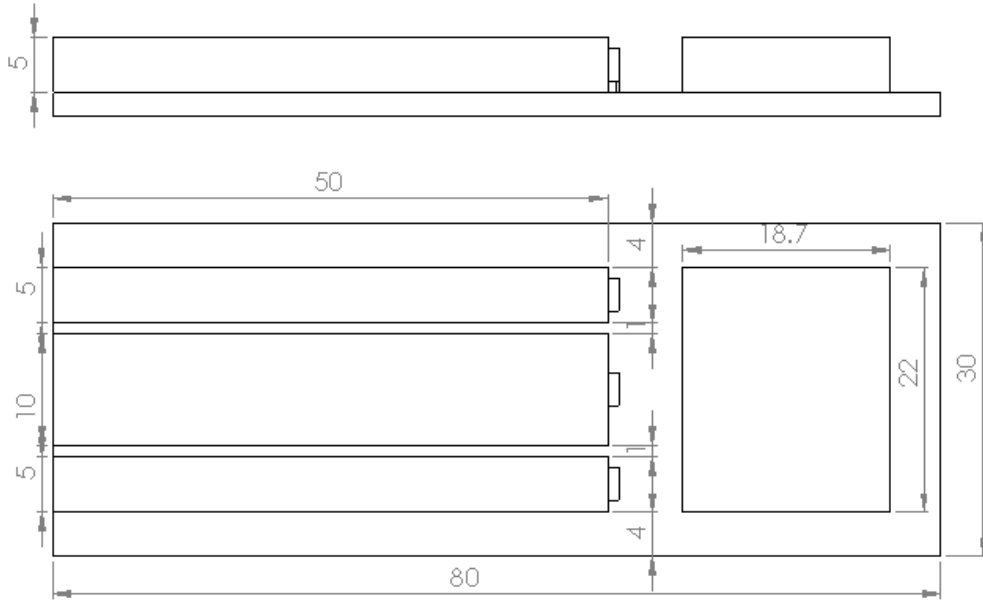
Detailed dimensions (expressed in mm) of the heating elements. (top) Cross-sectional and (bottom) top views.
